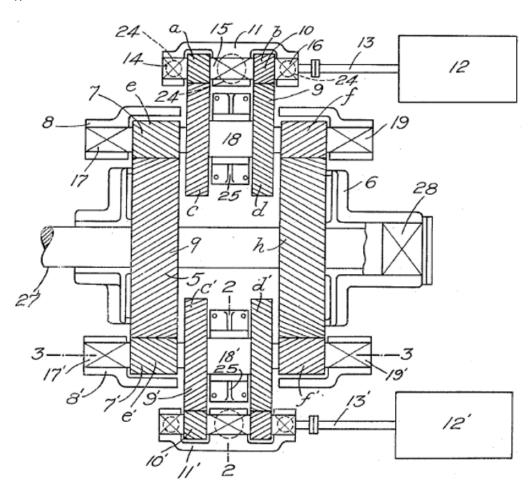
illustrates a toothed gearing with a fixed gear ratio and fourteen intermeshing gears. The gearing has one driven shaft (27) and two driving shafts (13) and (13').
